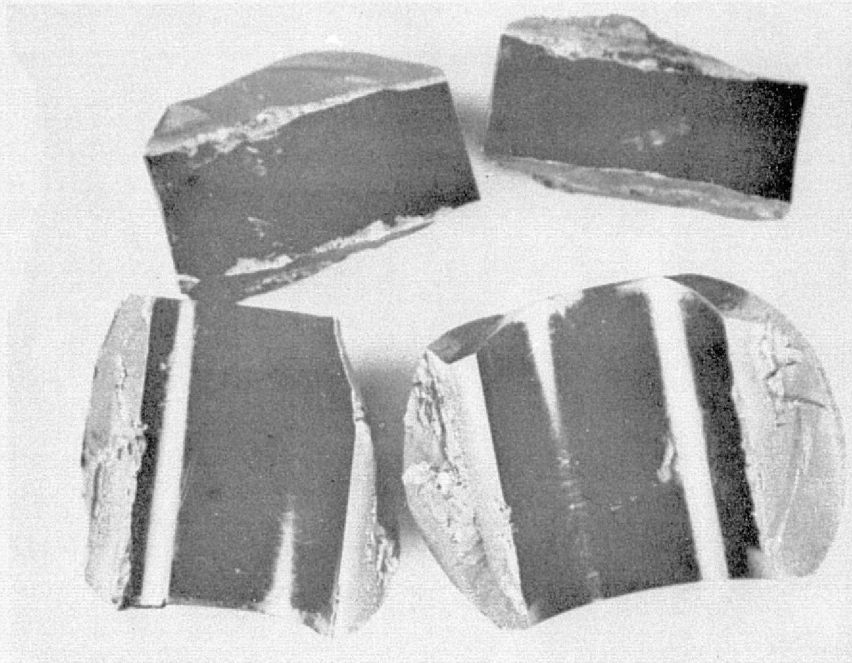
Fractured Design C Ball After 28.9 Hours Operation in MRC 9130-UK-29 Ball Bearing at 20000 rpm with Full Bearing Thrust Load of 20500 N (6850 lb.)
